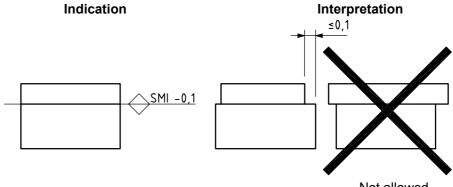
Permissible surface mismatch (SMI) between two mating mould components when specified with ± sign on the upper mould component
